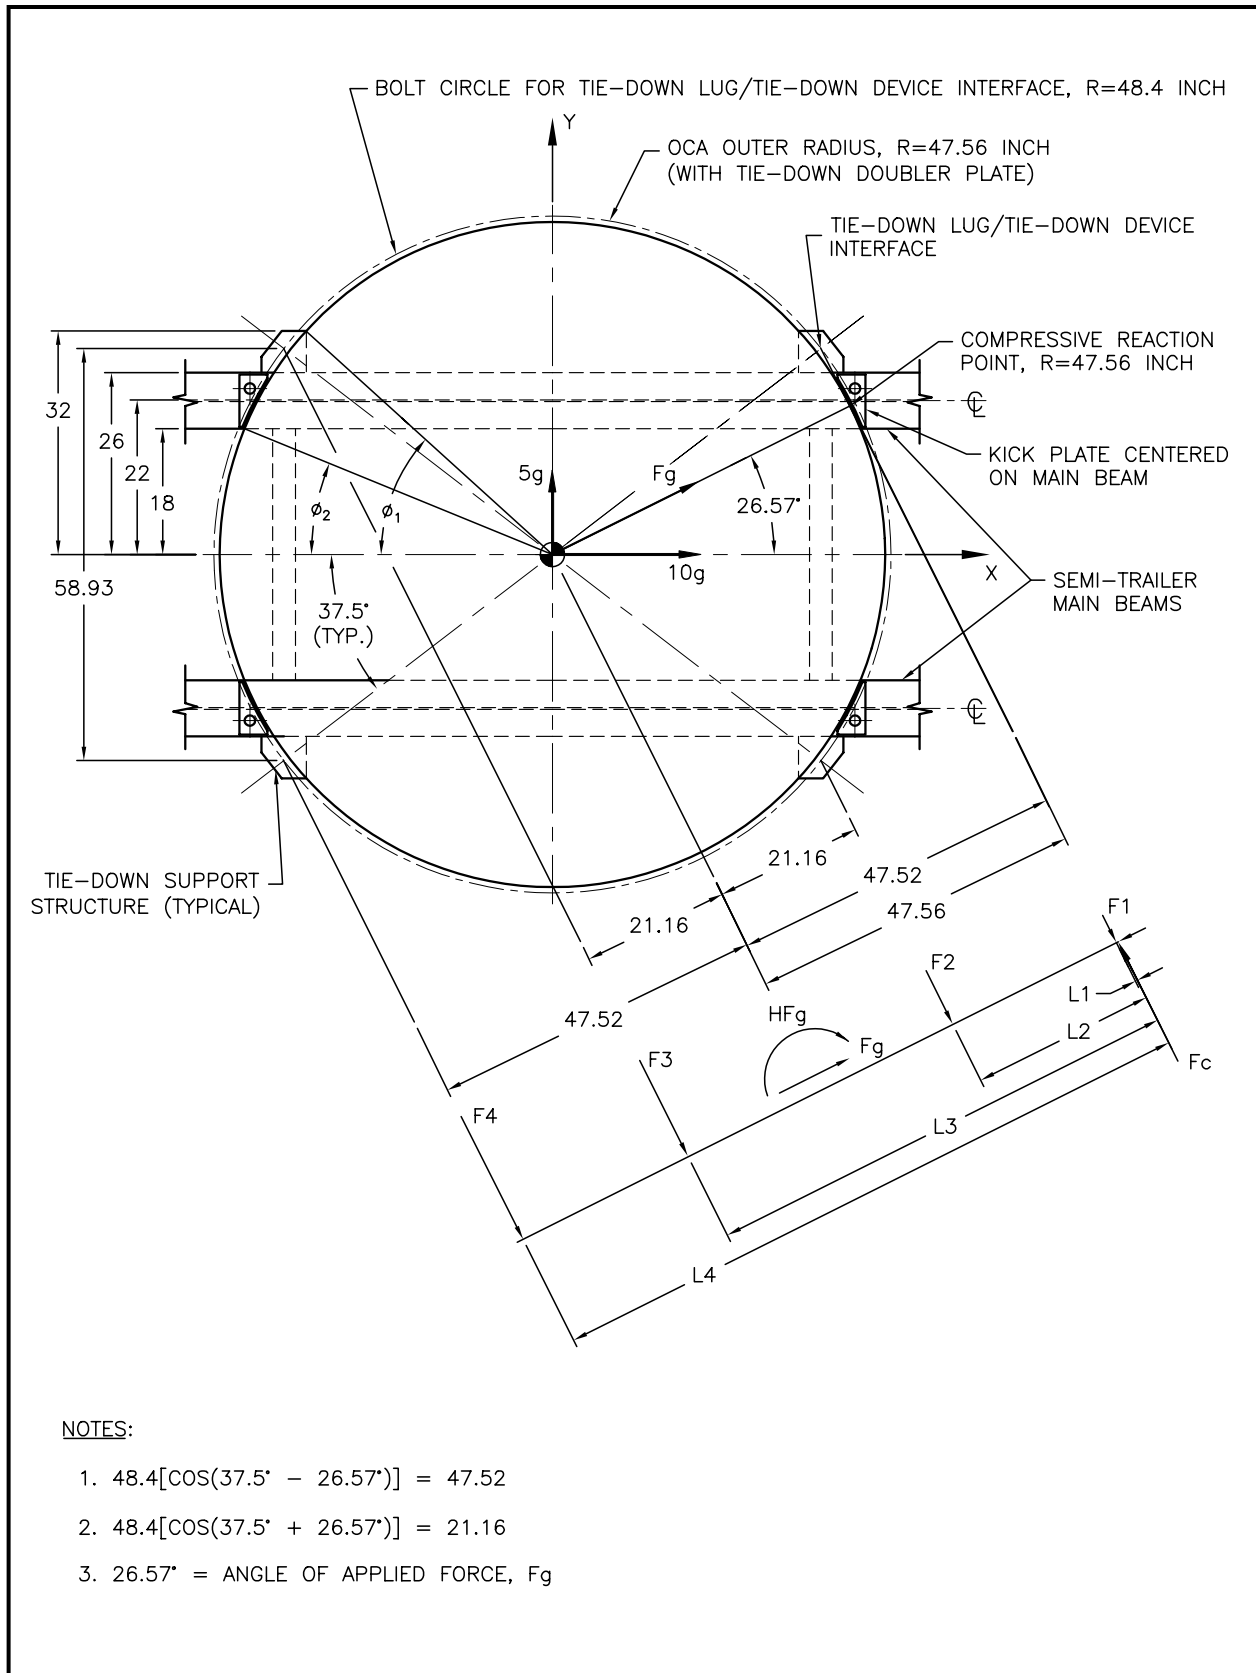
Tie-down Plan View and Reaction Force Diagram
